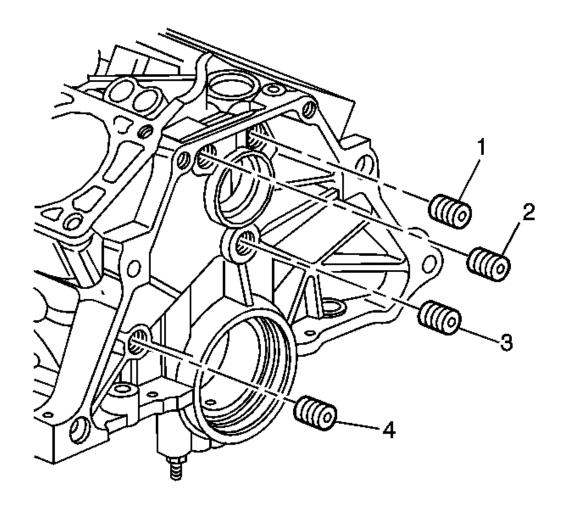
Installing Rear Oil Gallery Plugs Courtesy of GENERAL MOTORS CORP.
